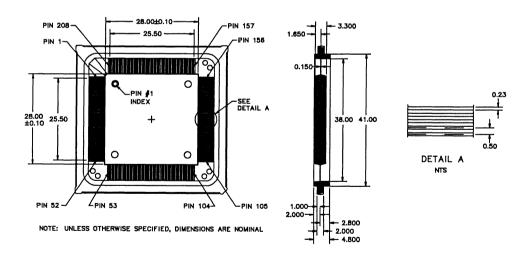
Molded carrier ring QFP, 208-lead customer package outline (1 of 4)
